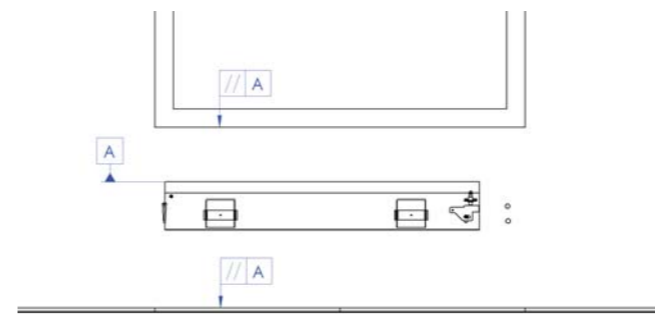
Align the bearing piece into a horizontal position and tighten the fixing screws.
